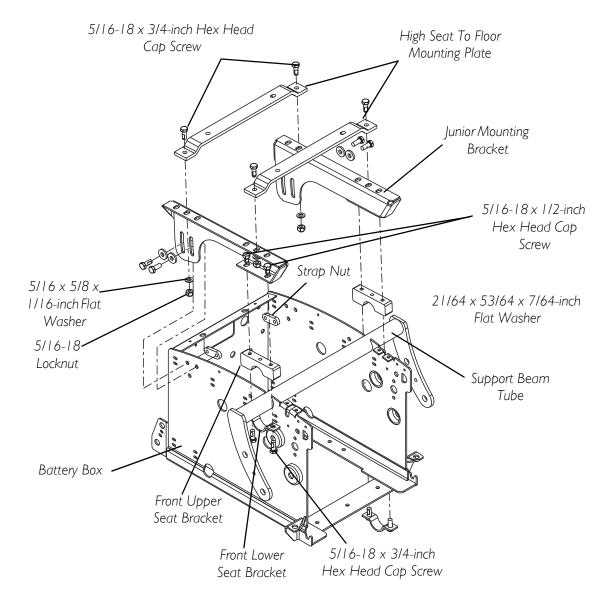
REMOVING/INSTALLING SEAT FRAME MOUNTING HARDWARE - MEDIUM SEAT TO FLOOR HEIGHT
